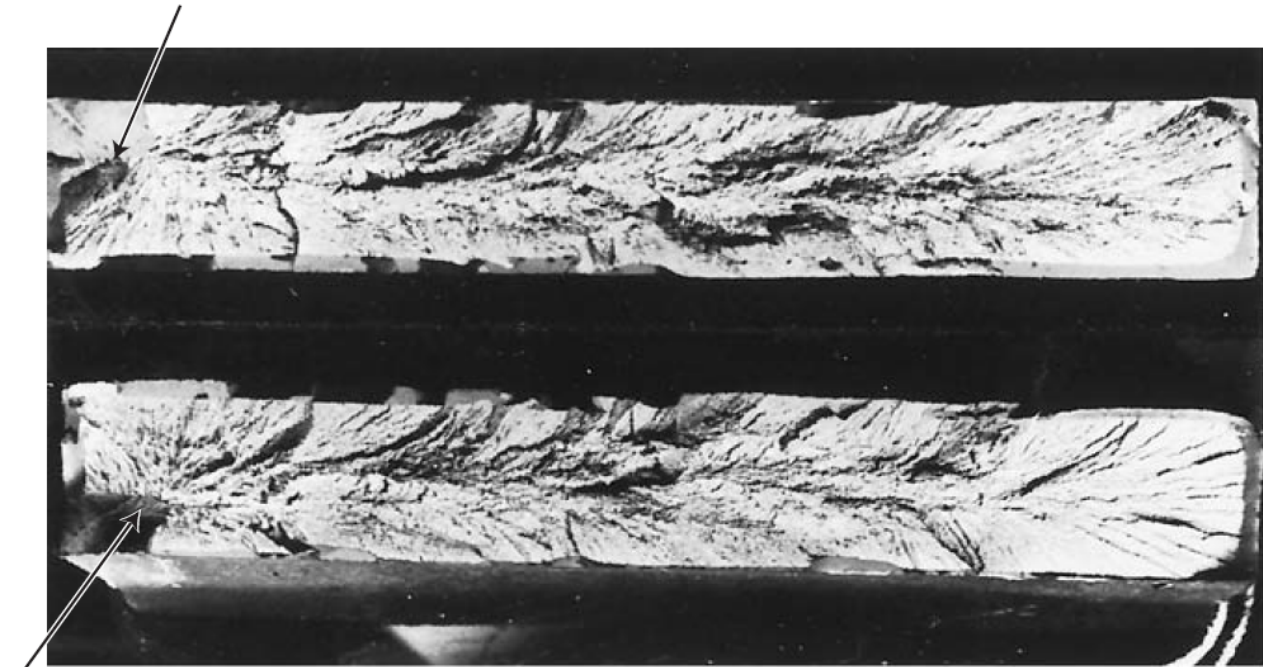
(b) Brittle fracture in a mild steel.
